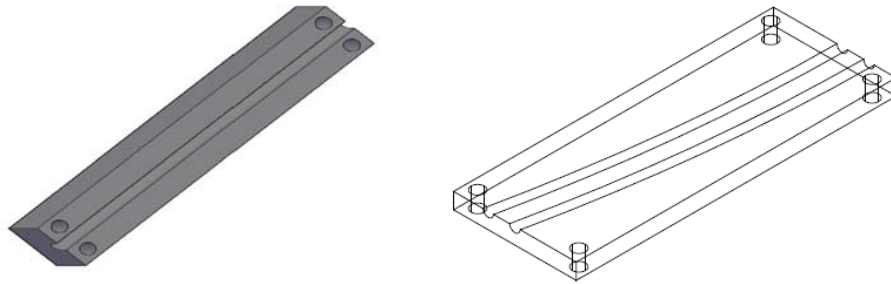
Original pump dump design (Left) and new pump dump design (Right)
